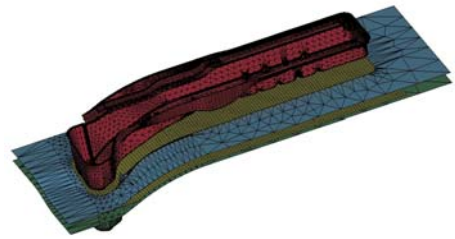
finite element model of tools and the blank for the analysis of the front side member inner.
